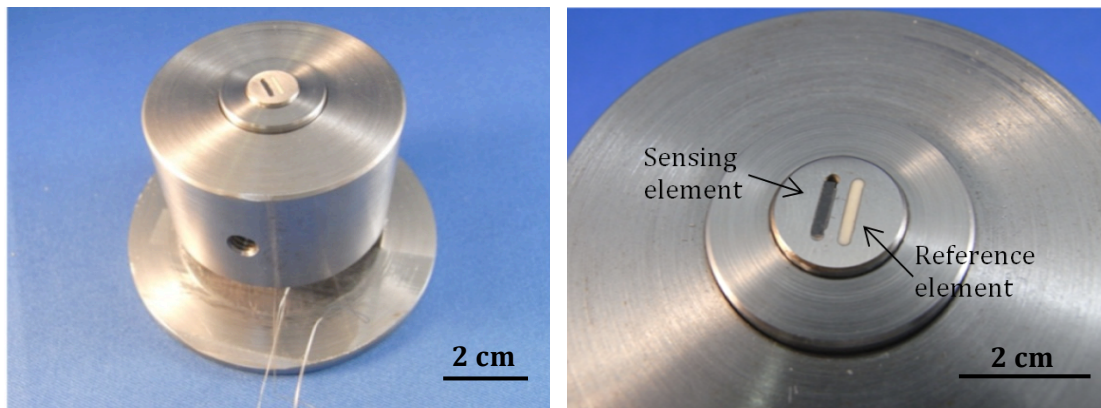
Prototype sensor placed into holder ready for the grinding test [146]
